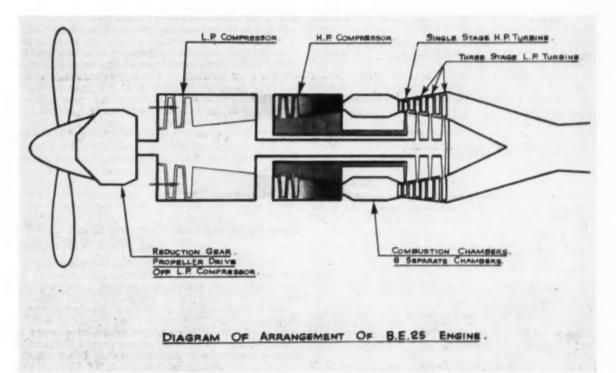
Path of the working fluid is: low-pressure compressor, high-pressure compressor, burners, single-stage high-pressure turbine, low-pressure turbine. Low-pressure compressor and turbine are on one shaft, which revolves inside the shaft connecting the high-pressure compressor and turbine.
